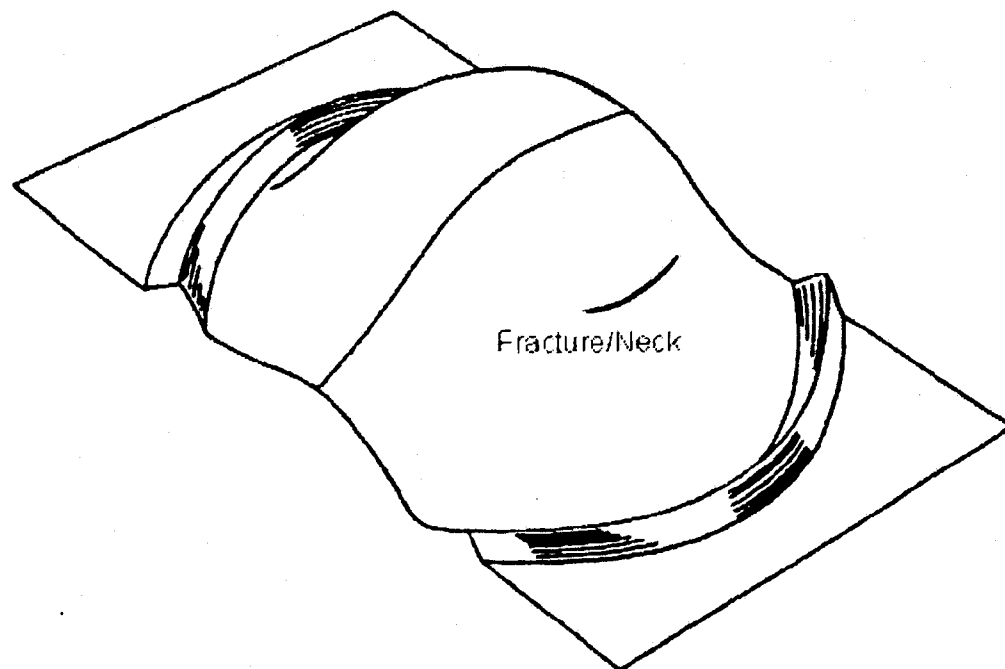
Formed specimen showing fracture/necking as the failure criterion [12].
